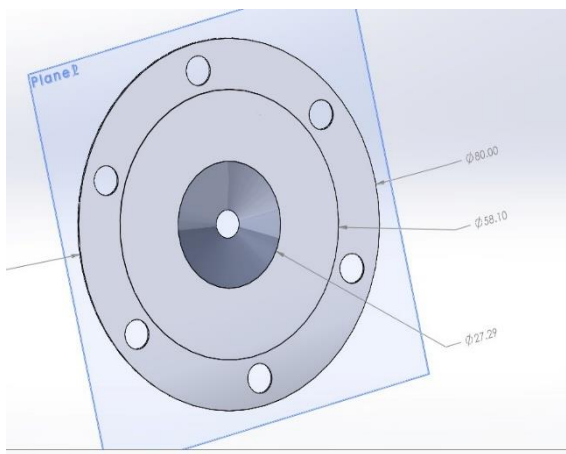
Dimensioned injector plate geometry used in the hybrid rocket motor
